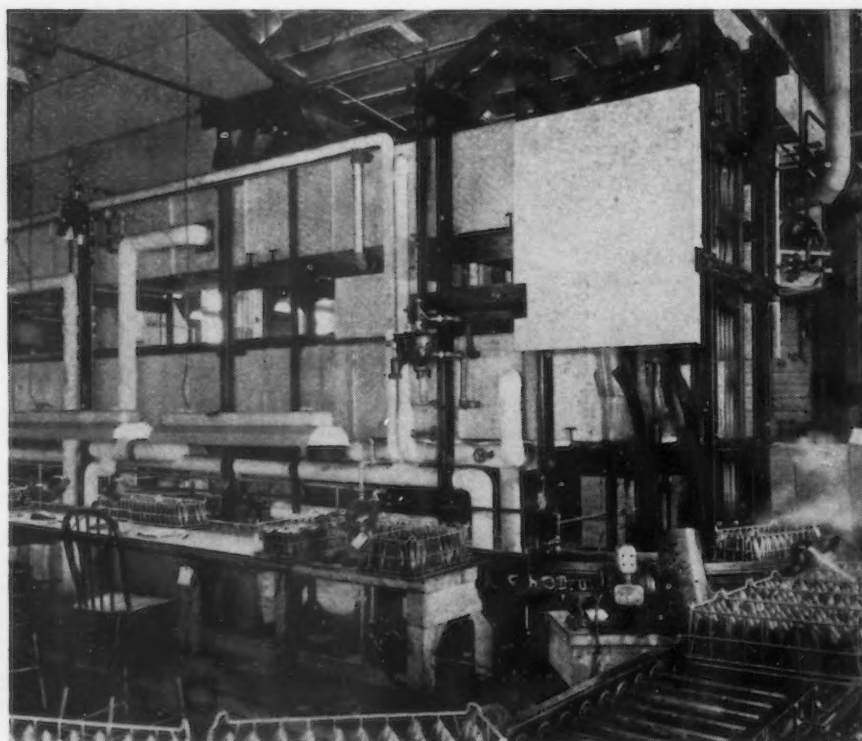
View of shot testing equipment built by Conditioned Air Equipment Co. for a Midwestern ordnance plant. Inspection benches are in front of the hot and cold water tank units.
